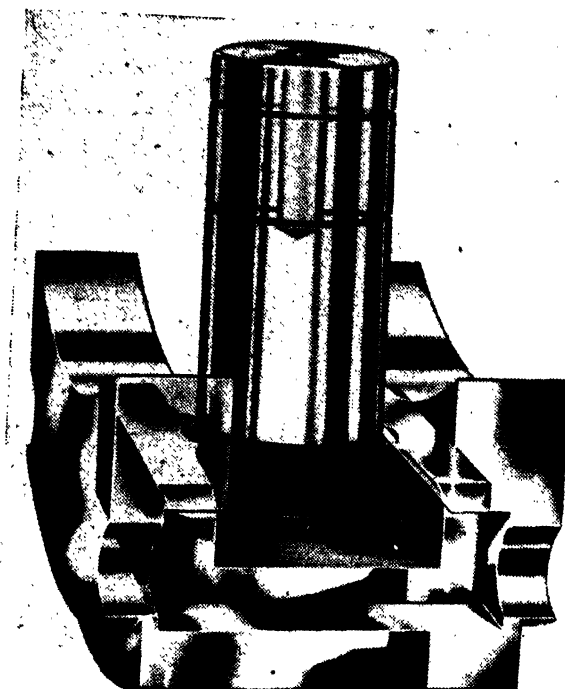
Piston and guide block. (*Hydro-Power Inc., Mount Gilead, Ohio.*)
